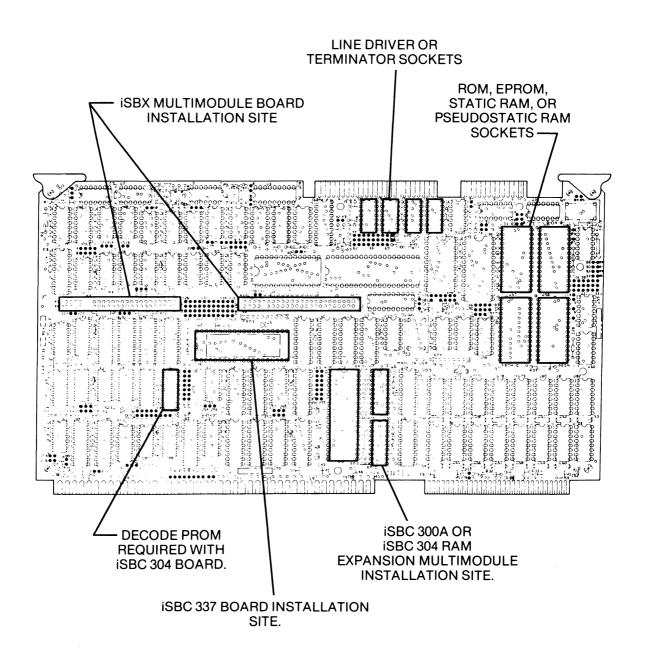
iSBC™ 86/14/30 Board User-Furnished Component Locations
